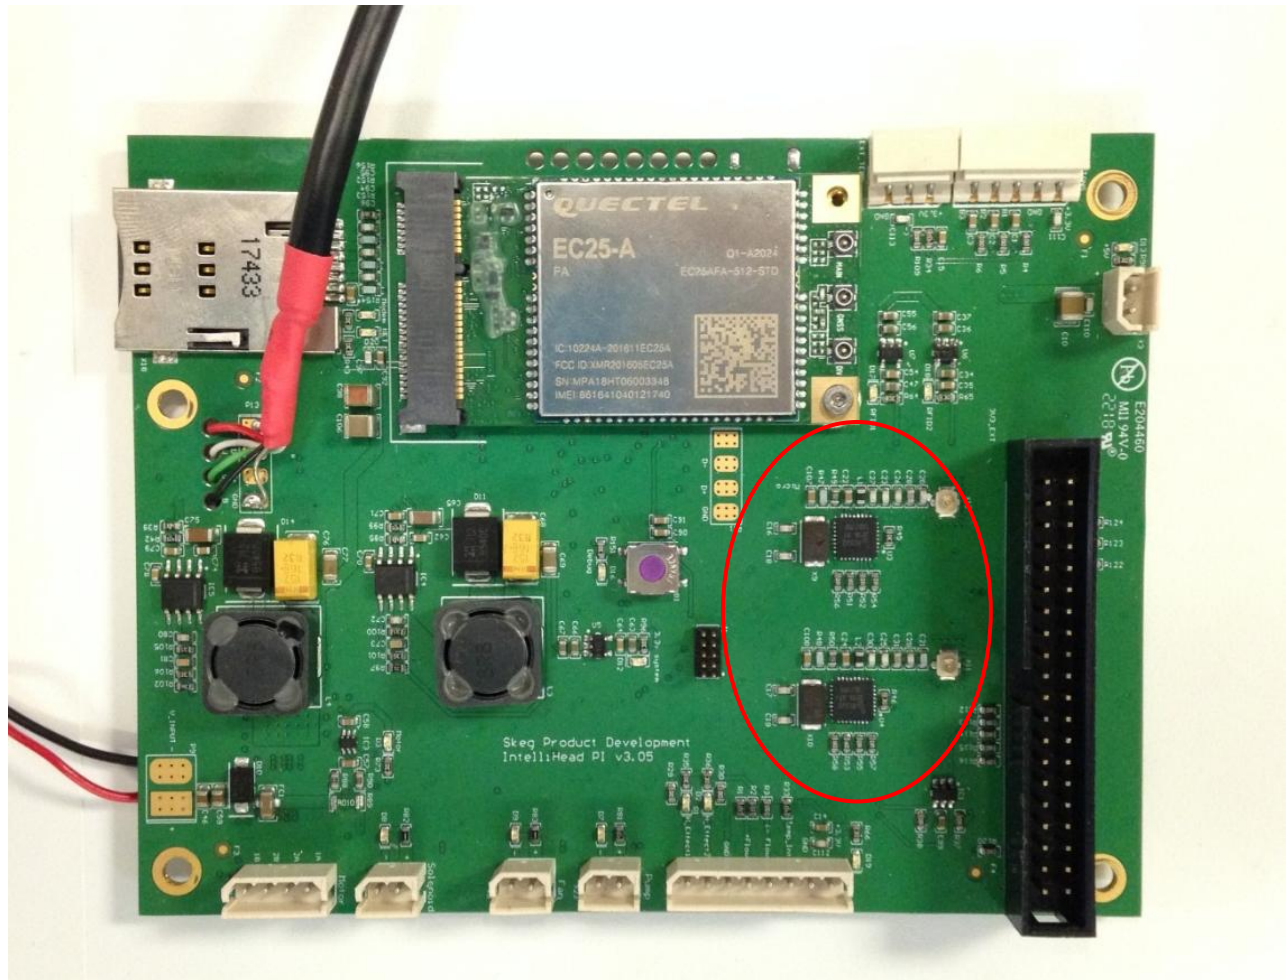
Main PCB (NFC Radio Board) in Enclosure
